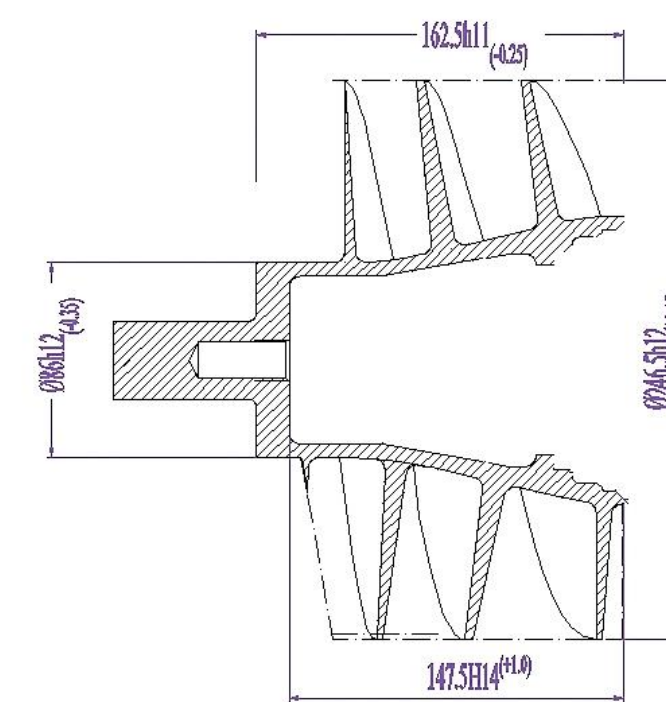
2D fabrication drawing of the inducer for the LOX booster turbo-pump for staged combustion cycle based rocket engine.
